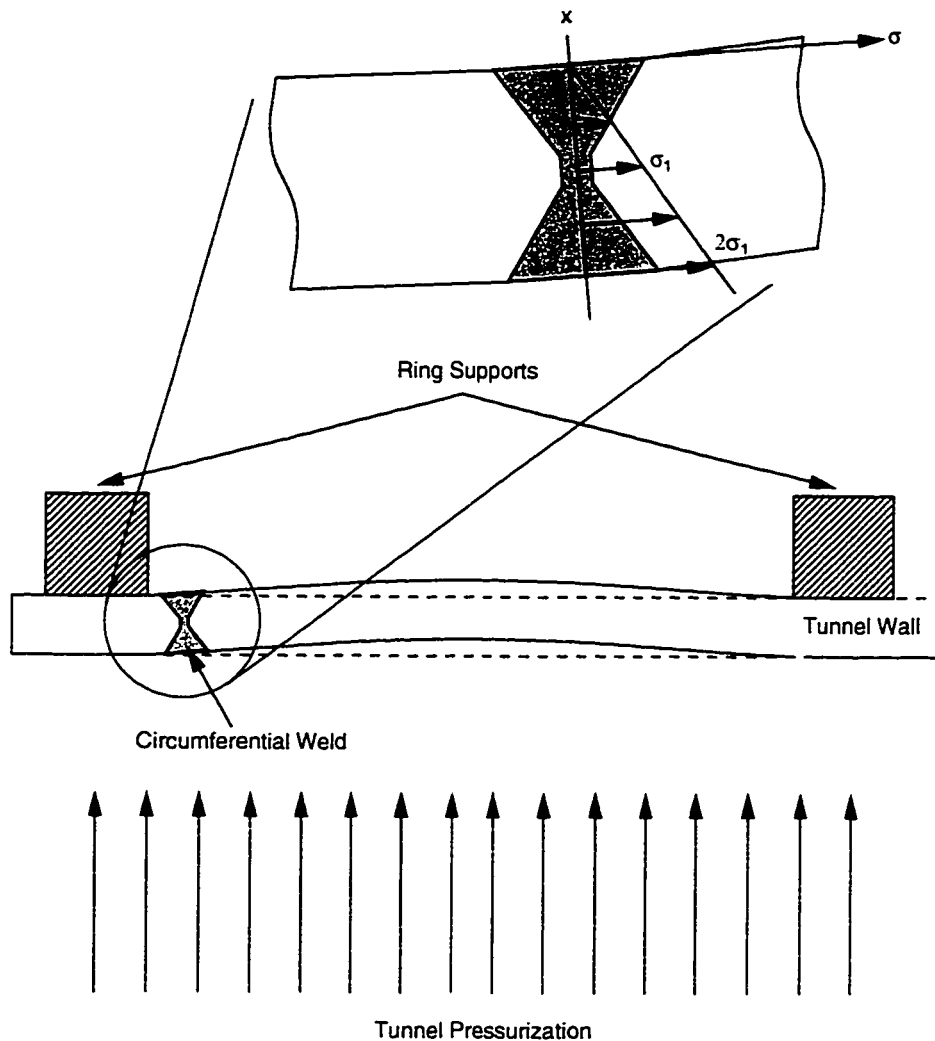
Stress due to bending in circumferential butt welds near ring supports.
